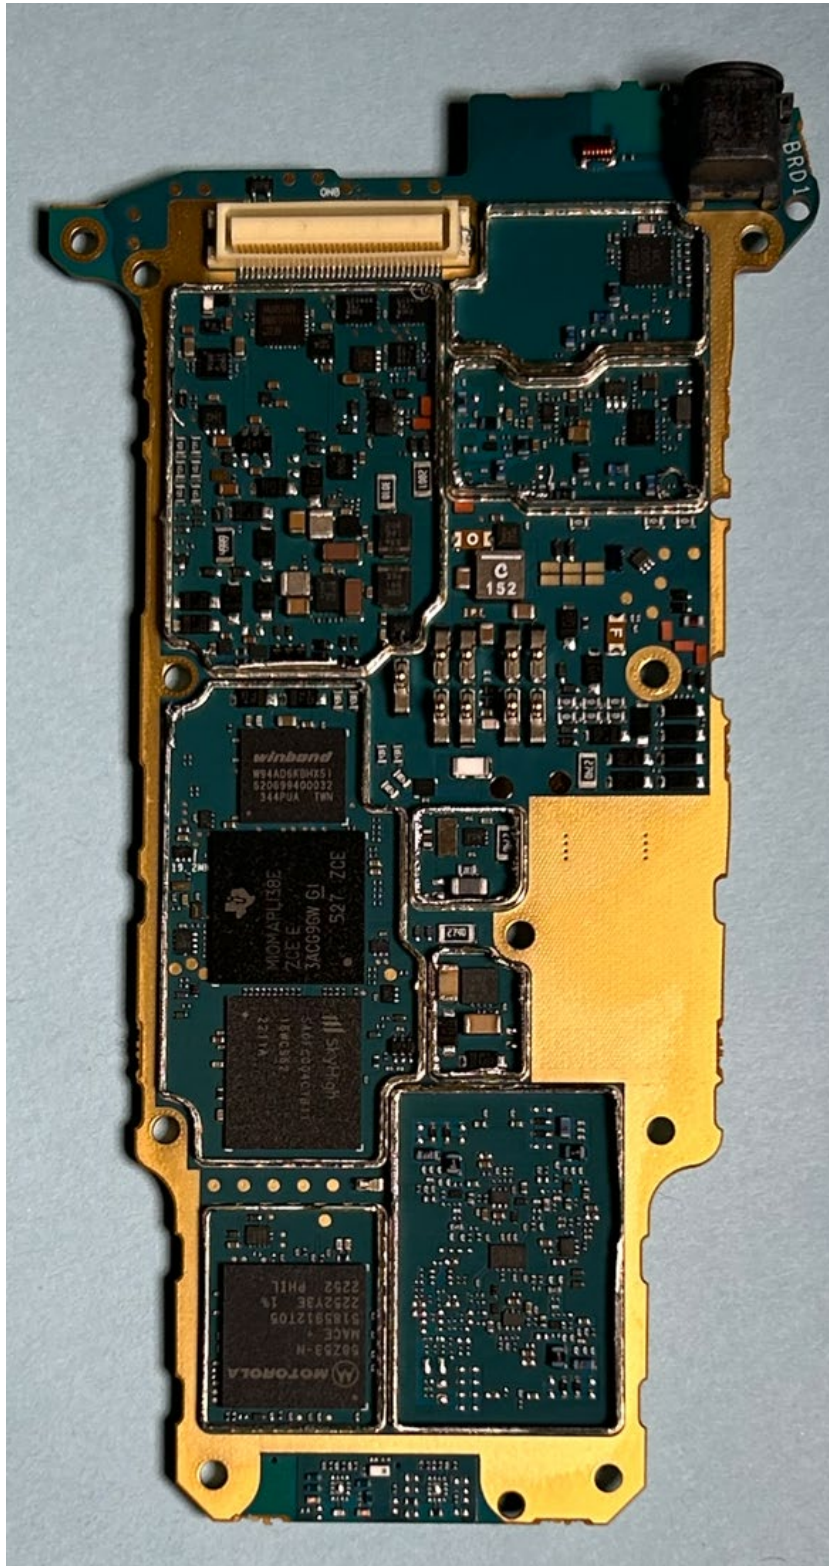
E – MAIN boards with chassis and housing for (Front Side)
